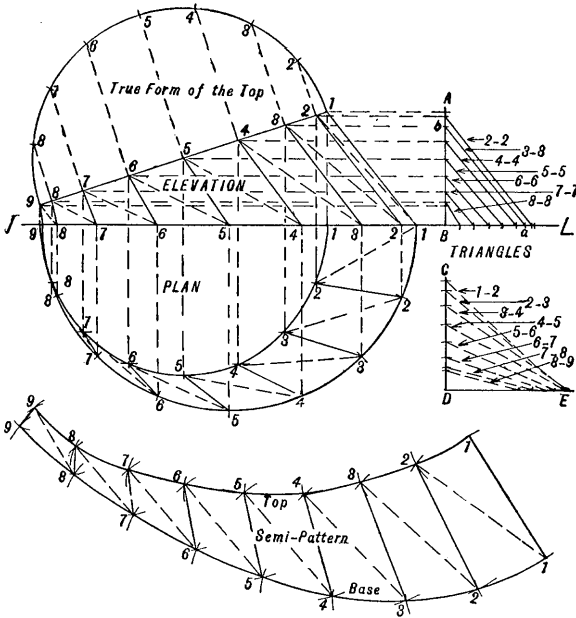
Plan, Elevation, Diagram of Triangles and Semi-pattern for One Piece of a Ship's Ventilator.
